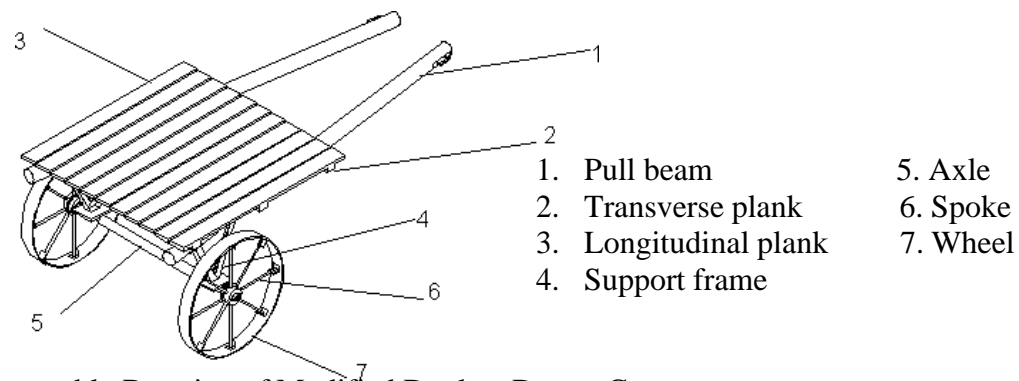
Assembly Drawing of Modified Donkey Drawn Cart
